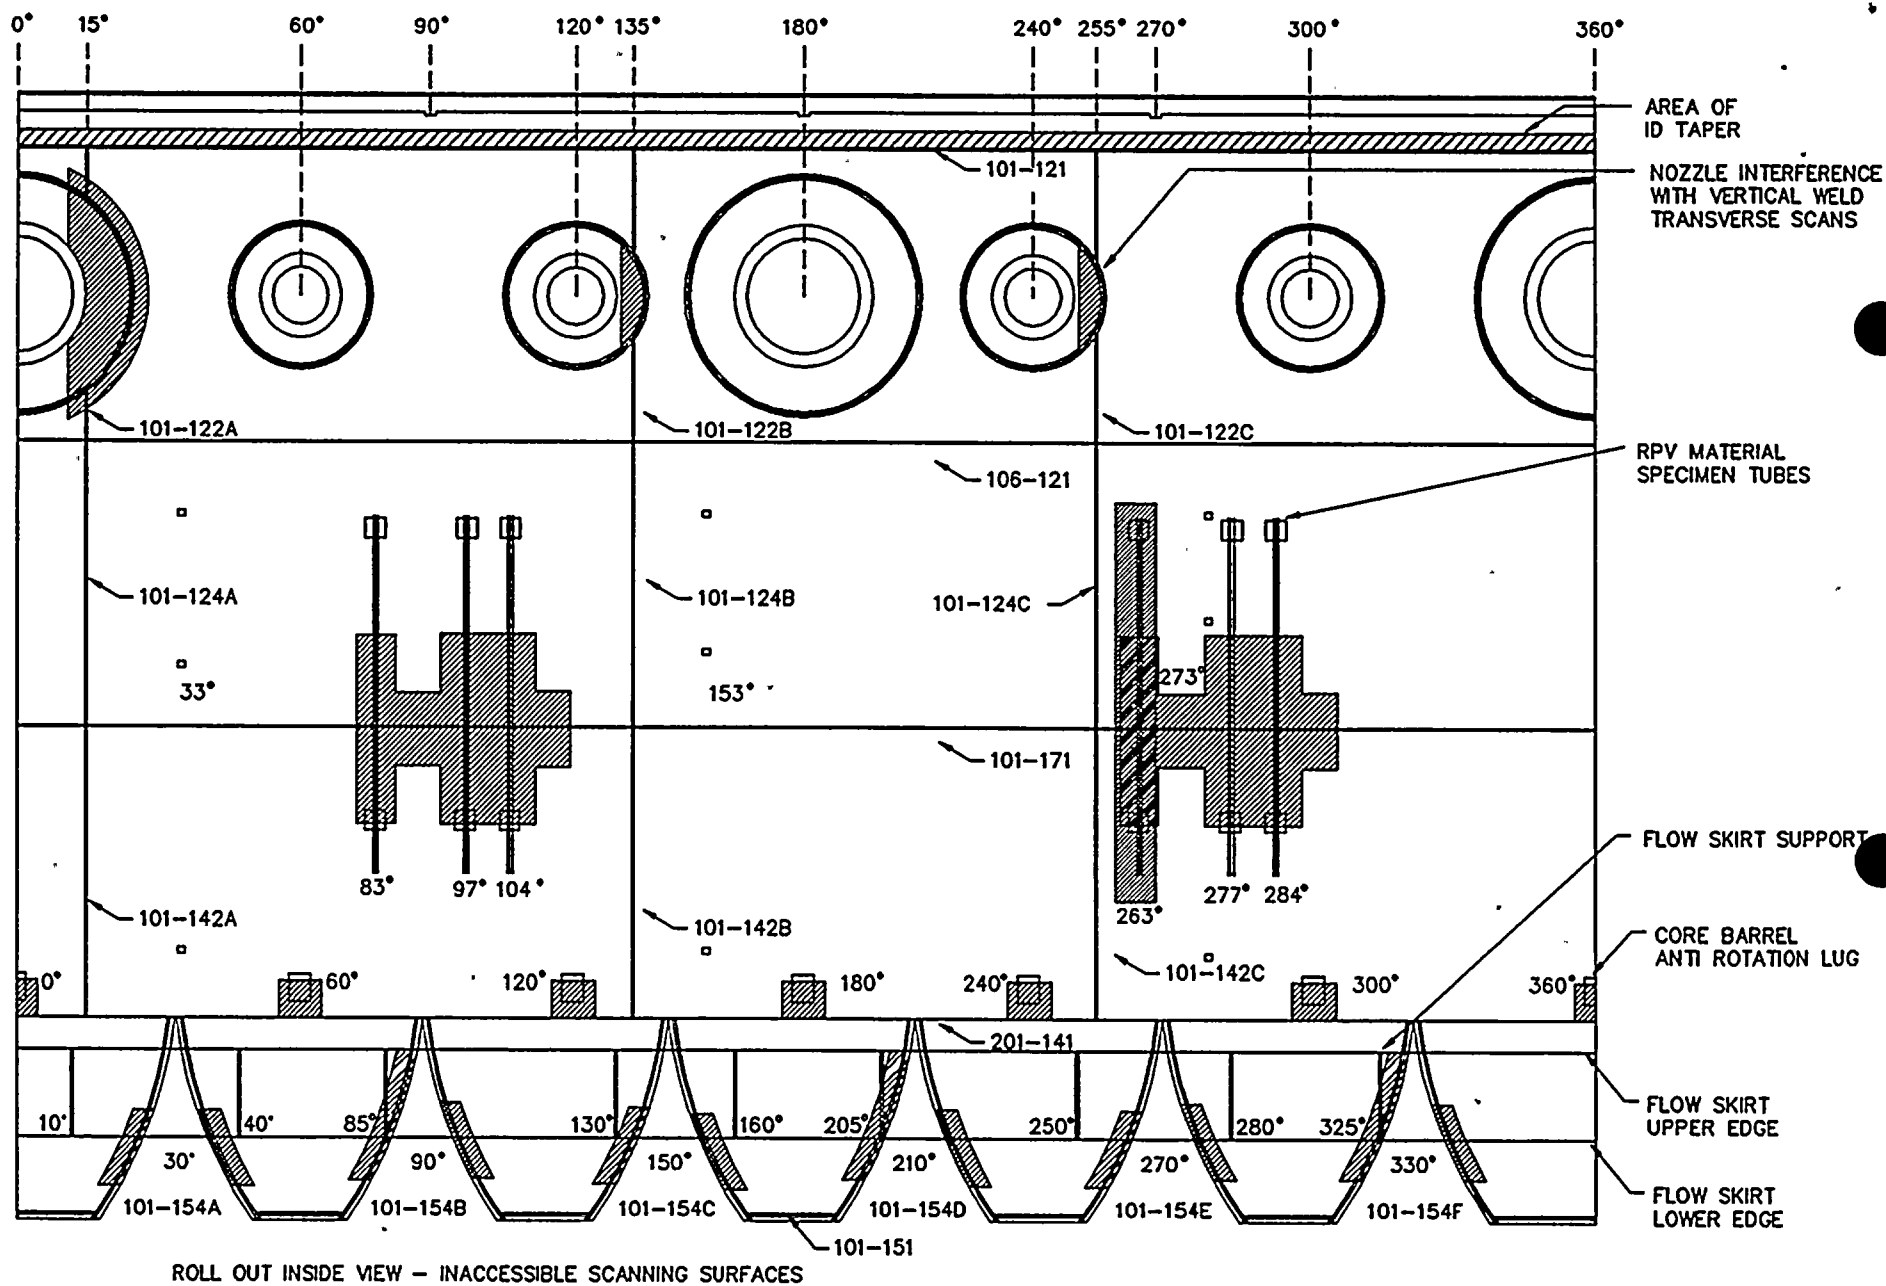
REACTOR PRESSURE VESSEL ROLL OUT VIEW
